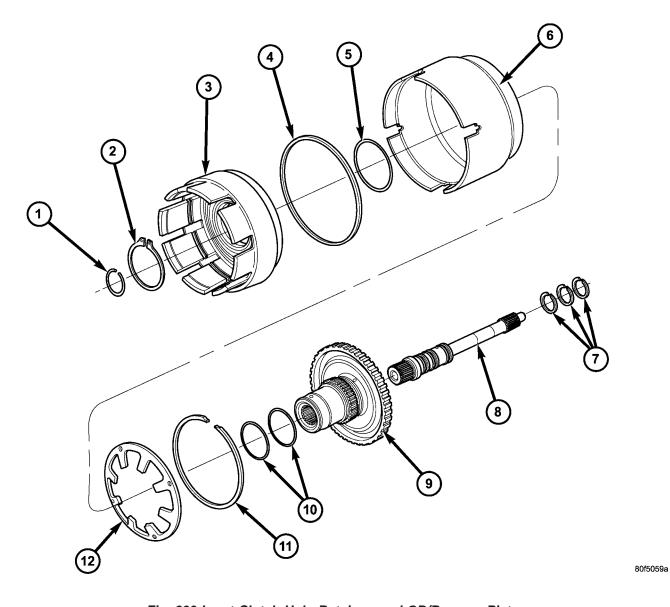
Input Clutch Hub, Retainer, and OD/Reverse Piston
